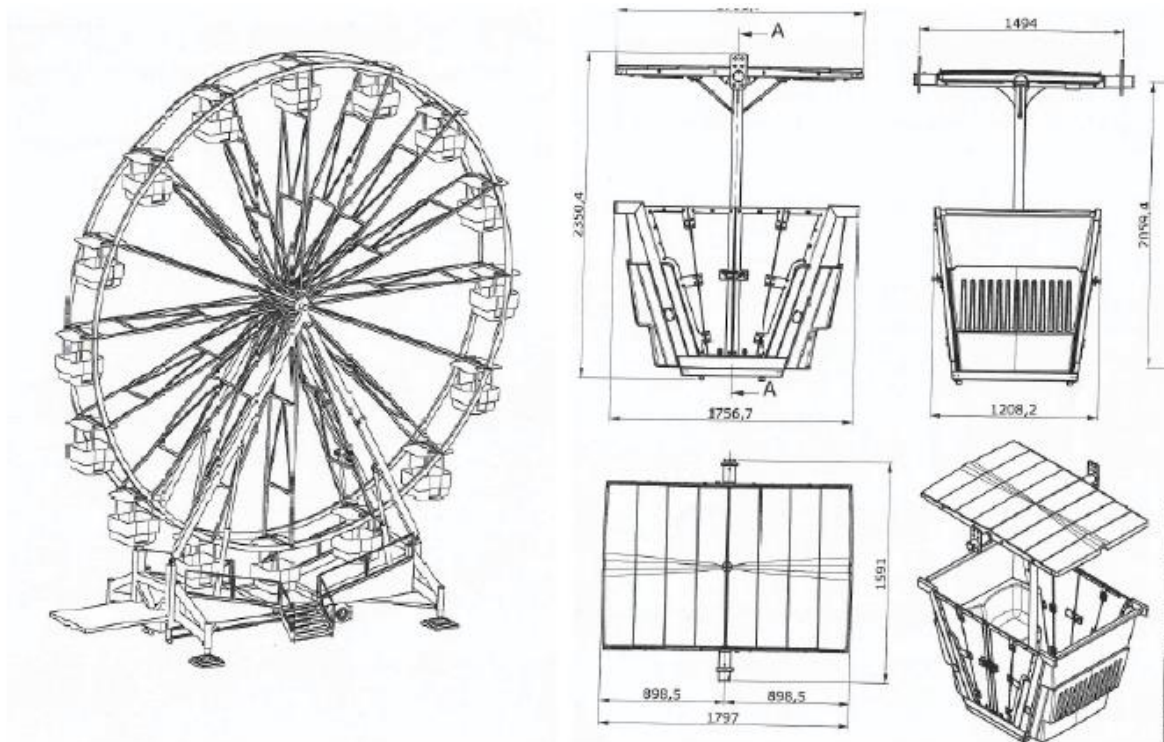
3D design overview drawings of the proposed Ferris wheel (left) and cars (right)
